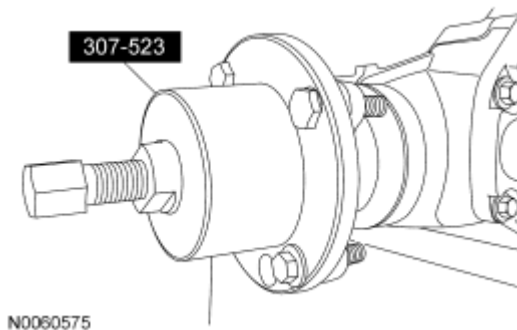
Removing Output Pinion Flange Using Special Tool (307-523)
